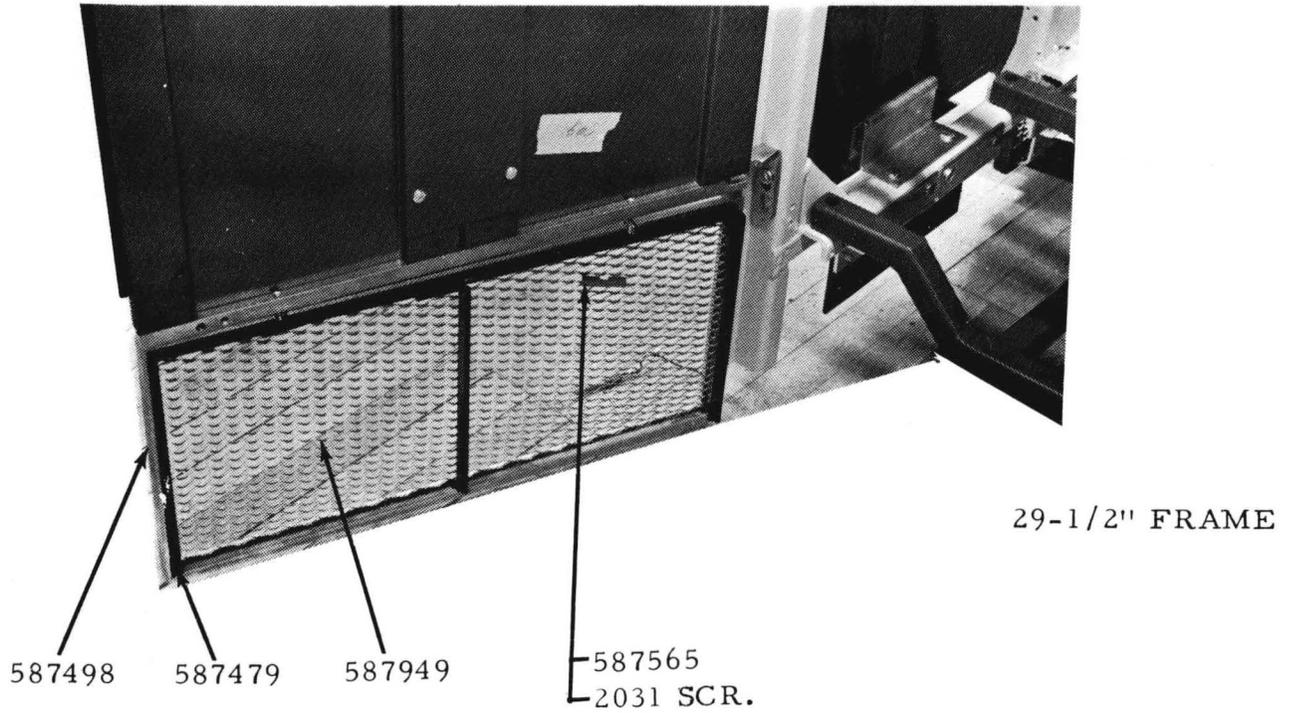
KICKPLATE MOUNTING - FRONT AND REAR SMS FRAMES
